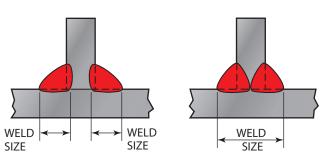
If the total weld sizes are equal, then both tee joints would have equal strength.
